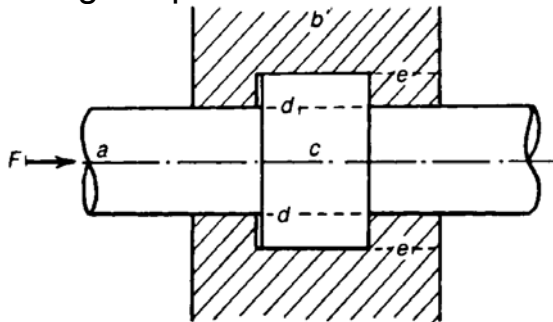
Thrust on the collar of a shaft, generating shearing stress over the planes d .
